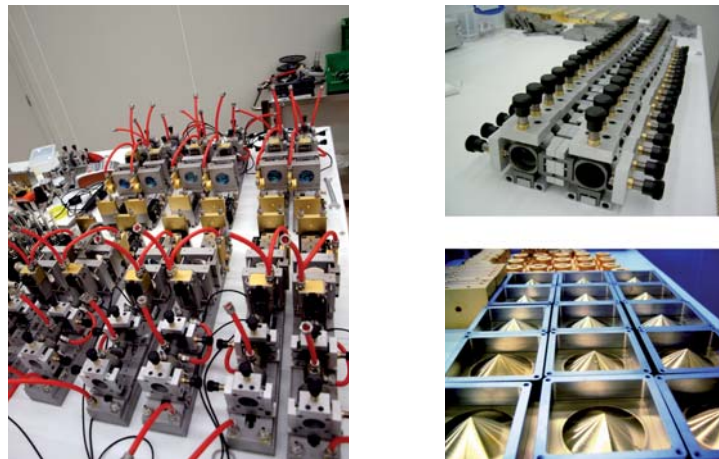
Production of subassembly components, left: laser head modules, top-right: XY-positioning mounts, and bottom-right: gold coated copper heat sinks.
